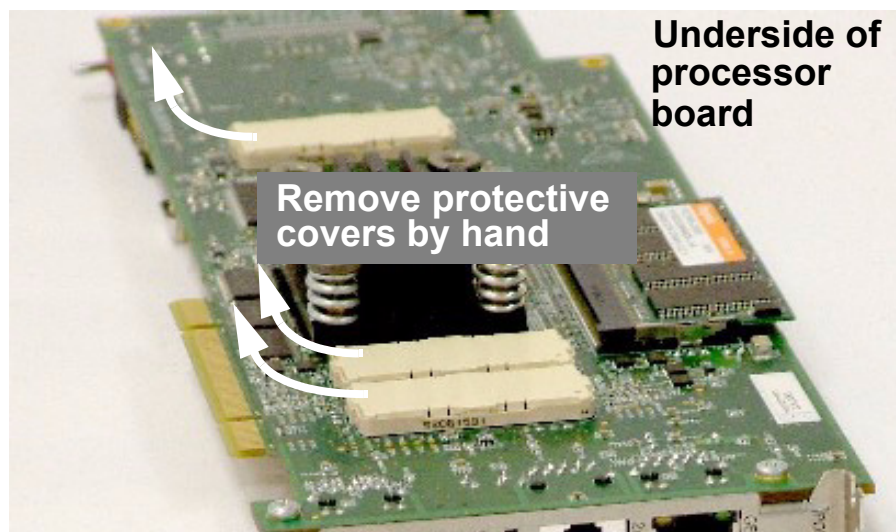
Remove Protective Covers from 300-pin connectors (underside of MPC8360EA MDS Processor Board shown)
